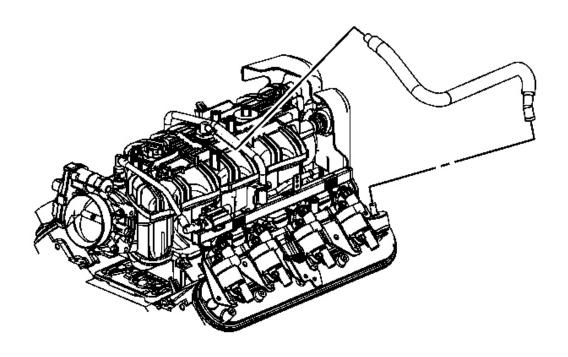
Positive Crankcase Ventilation Hose/Pipe/Tube Replacement Courtesy of GENERAL MOTORS CORP.
